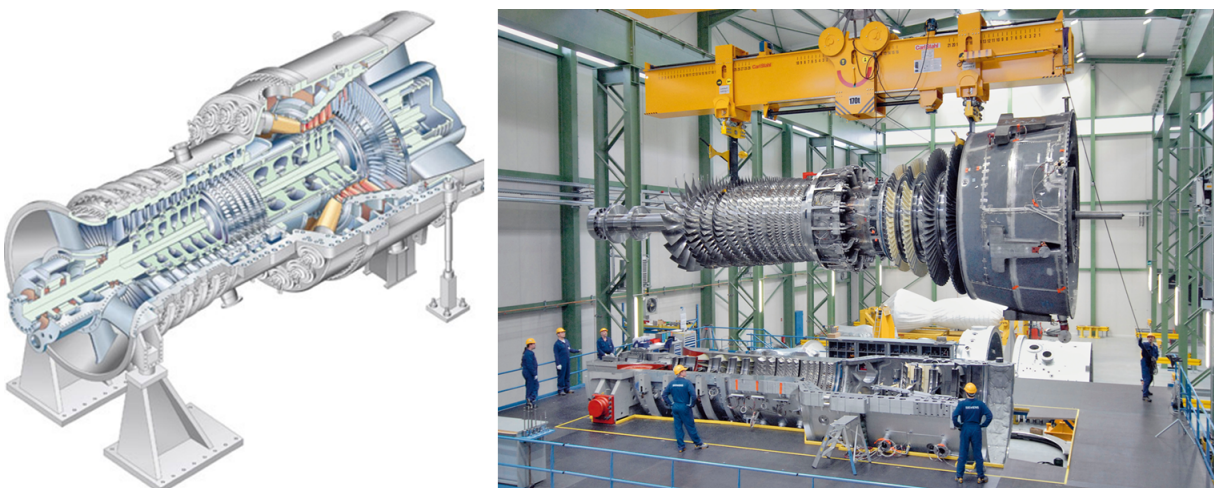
Cut-away schematic and picture of the rotor assembly of a SGT5-800H, Siemens's most powerful gas turbine.
